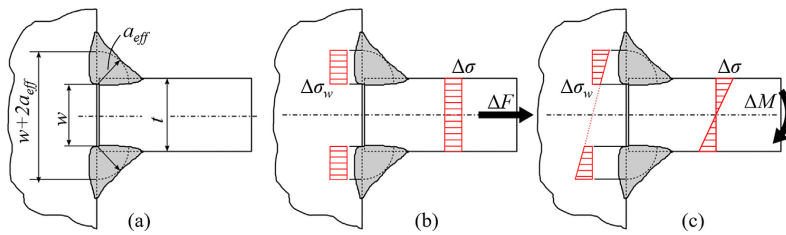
(a) Dimensions of LC joints, and weld stresses for (b) axially and (c) bending loaded specimens in terms of the nominal stress system.
